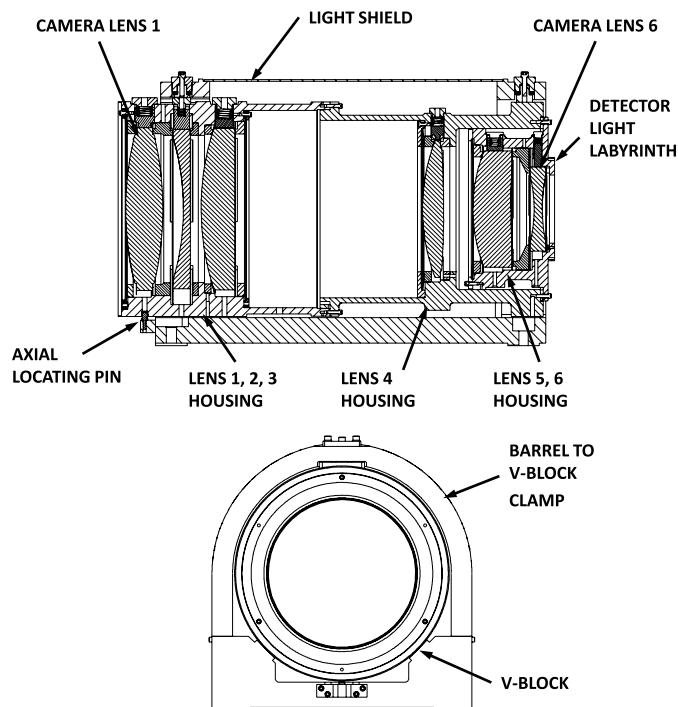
Camera assembly showing the overall mounting scheme for the six camera lenses.
